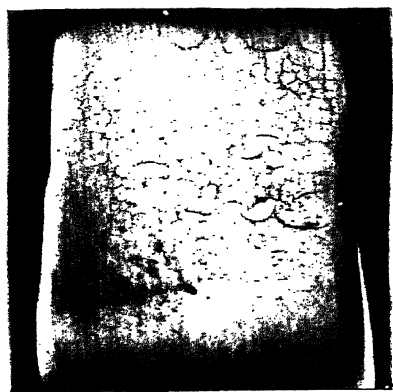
Showing grinding cracks on surface of case-hardened cam
